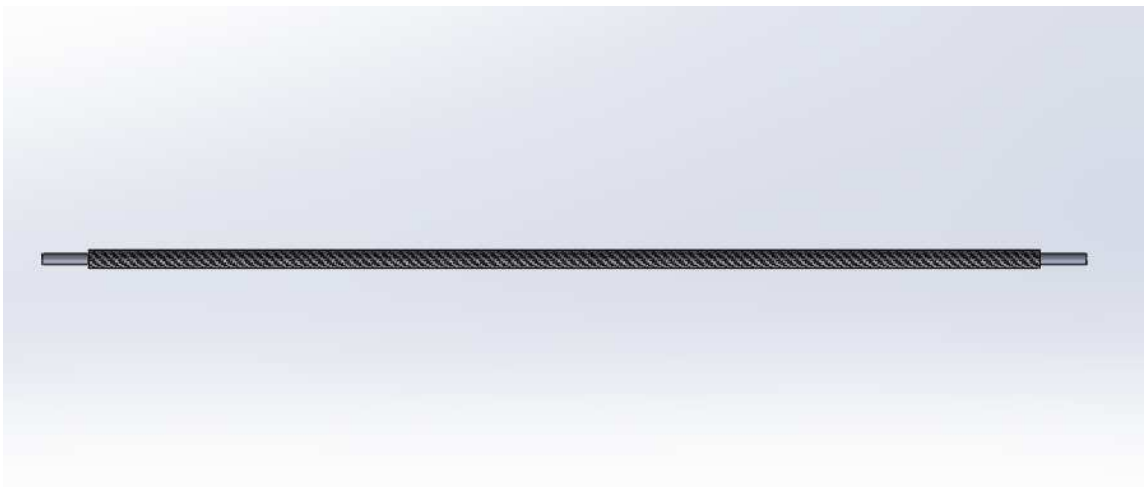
29: 3D CAD drawing of the final design of carbon fiber shaft
